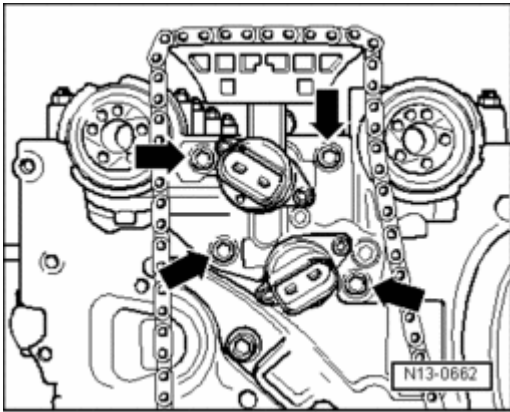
Locating Control Housing-To-Cylinder Head Bolts
